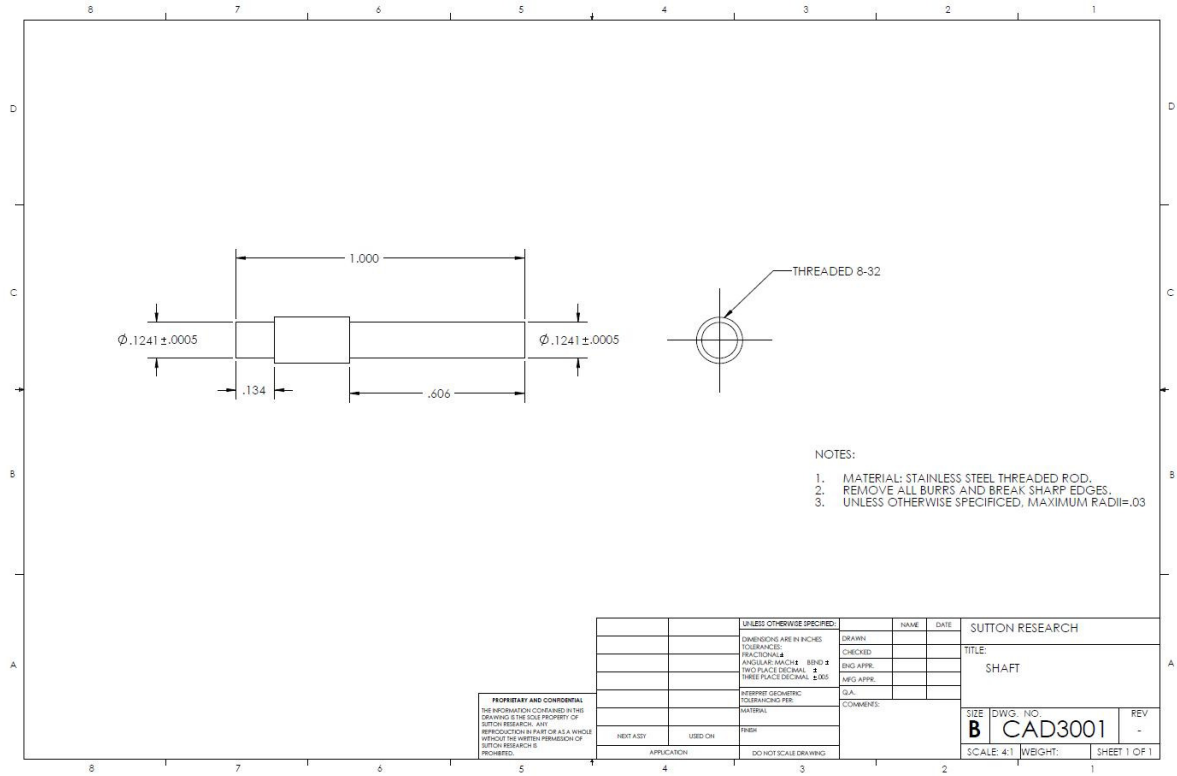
Shaft Drawing. This figure details the shaft for the permanent magnet machine built and tested for experiments 3 and 4.
